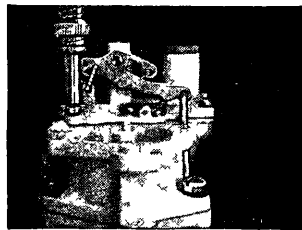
With throttle connector link in place, adjust pump stroke. With connector link in proper pump arm hole, stroke can be measured by using universal pump stroke gauge T109-1175. Place gauge on ridged portion of bowl cover with indicator ear on top of pump shaft (also see Fig. 100). Measure distance between closed and wide open throttle. Adjustment is made by bending throttle connector rod at lower angle (see Carter Specification table)
